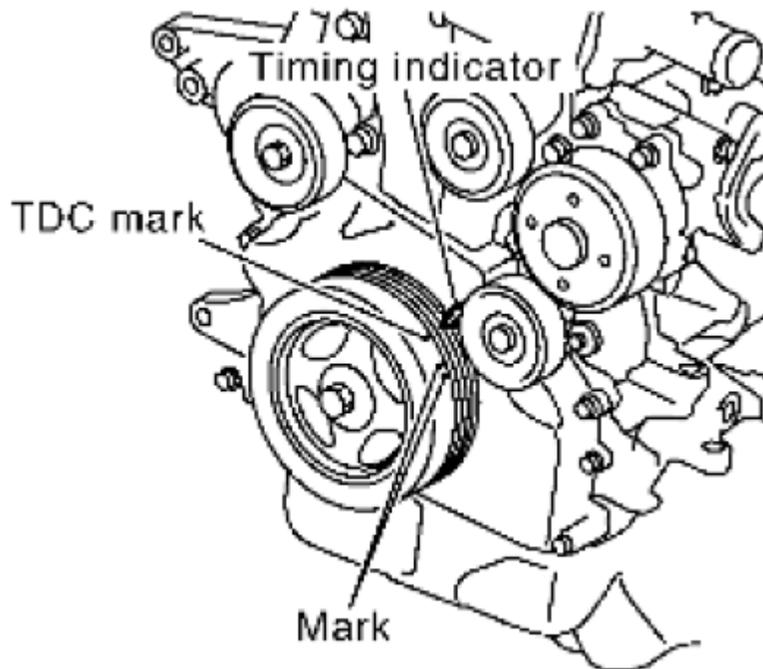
Aligning TDC Mark To Timing Indicator On Front Cover
